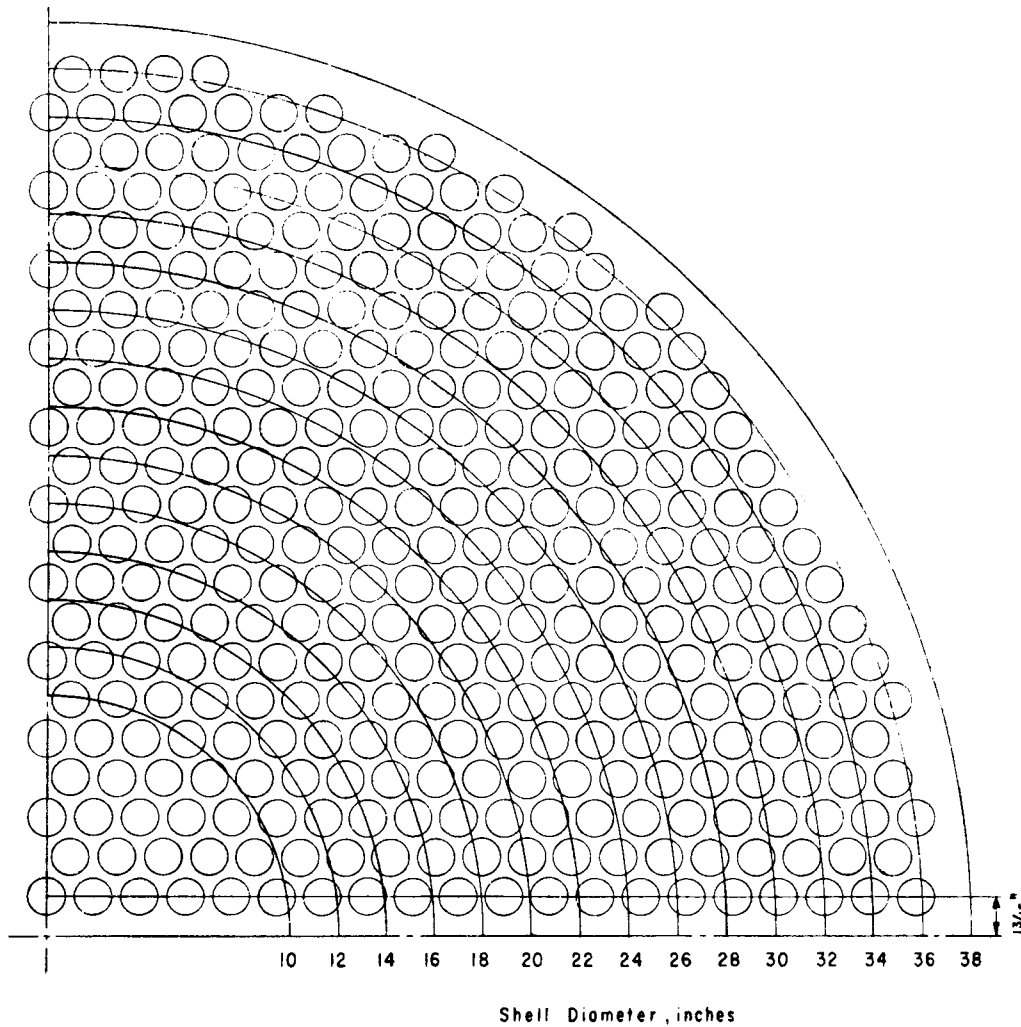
E. Tubesheet layout for U-tube exchanger. Tube passes: two or four. Tube size and pitch: 1 in. on 1 1/4 in. Δ. Radius of bend: 1 1/2 × tube diameter.
